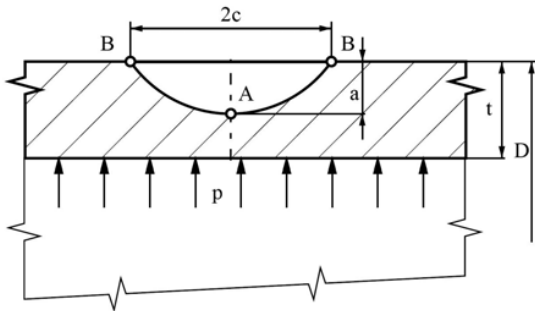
An external longitudinal semi-elliptical crack in the wall of a cylindrical shell
